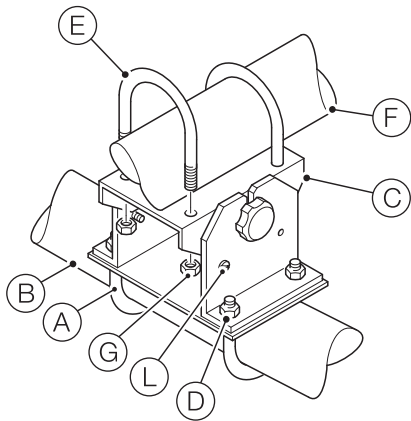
Fitting tilt bracket assembly ADS430125 and ADS430128
